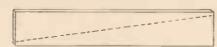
How both sloping sides may be cut from one board 3ft. 6in. × 3in. × 1in.
